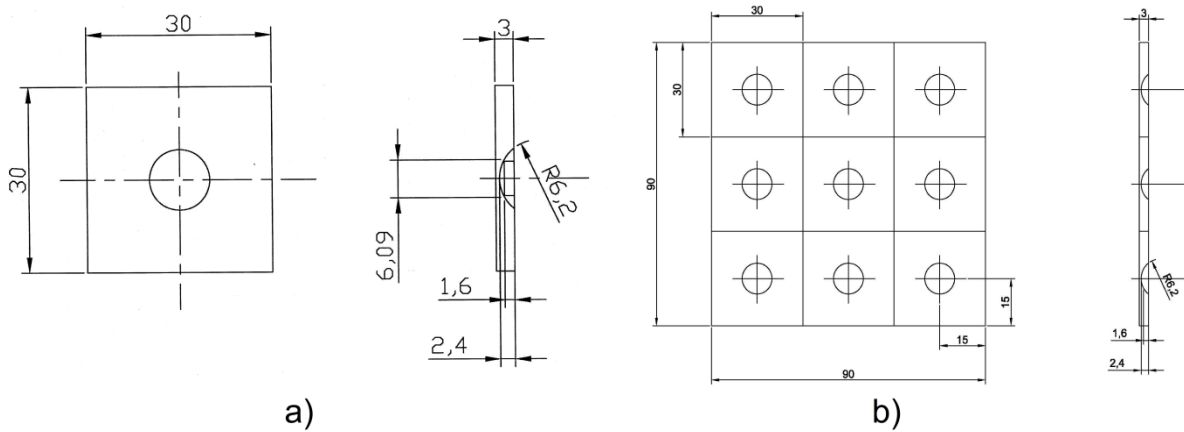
Drawing of scintillators: a) single samples, b) block-samples
